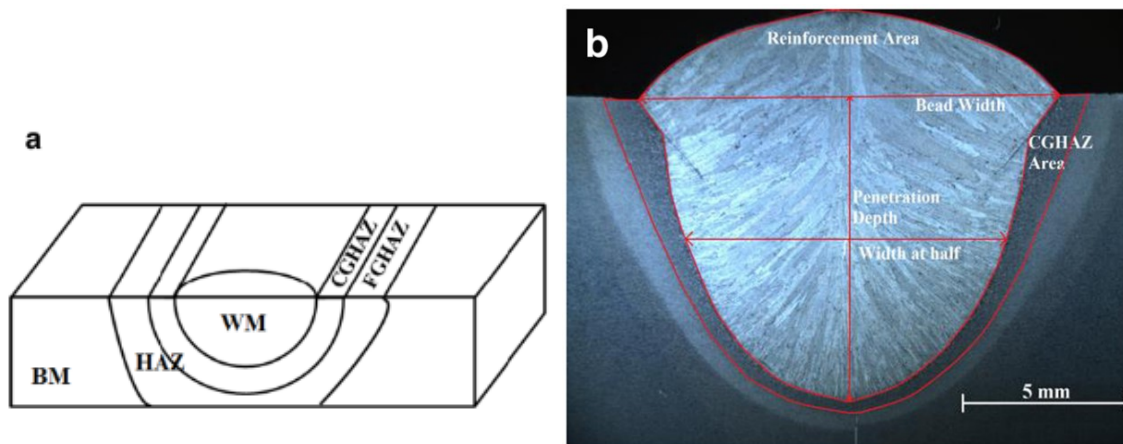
a) Schematic of the weld indicating different weld zones. b) Optical macrograph of X70 steel welded by CWTSAW indicating the geometric characteristics [8].
